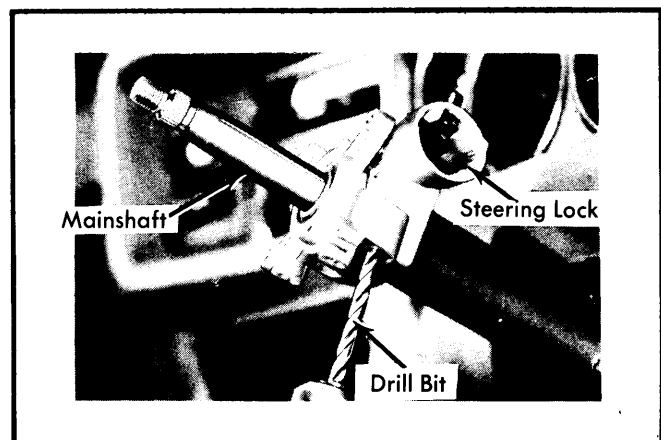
Drilling Out Shear Head Bolt to Remove Steering Lock from Shaft
